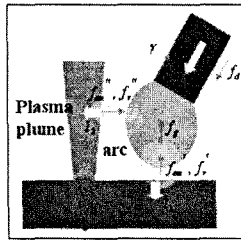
Physical model of pulsed laser-dip-transfer DC GMA hybrid welding
